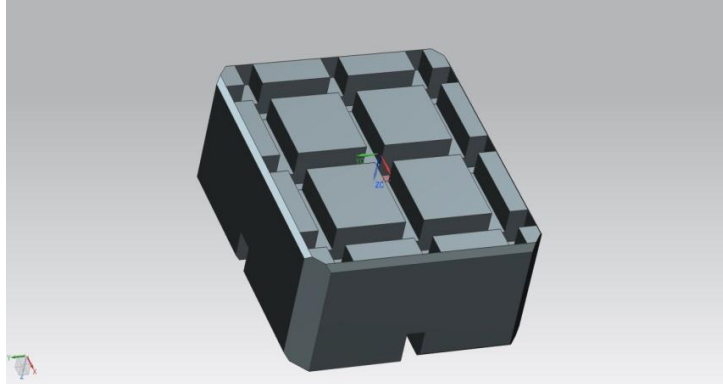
showing the tool holder which is provided with paths for the movement of the laser tool
